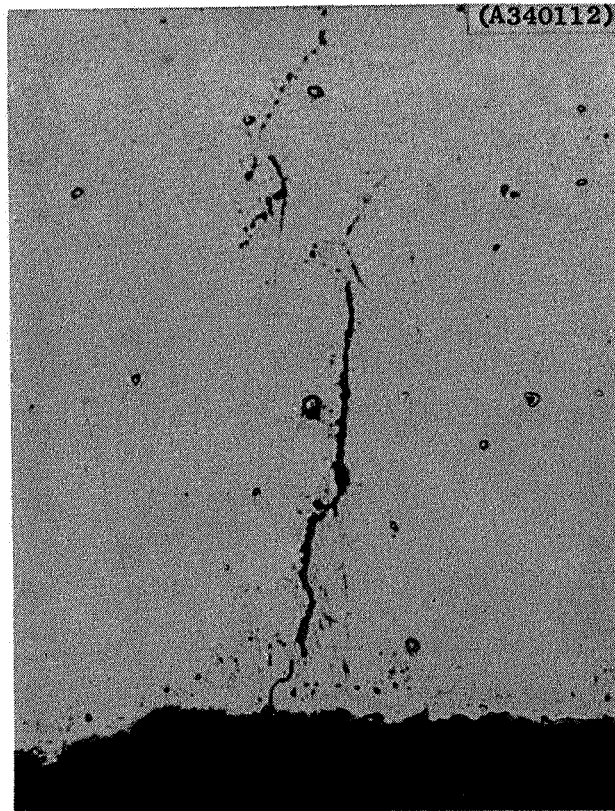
Forward Radius of Rene' 41 Turbine Blade Locking Strip Showing Strain Age Cracking. (A340112)
